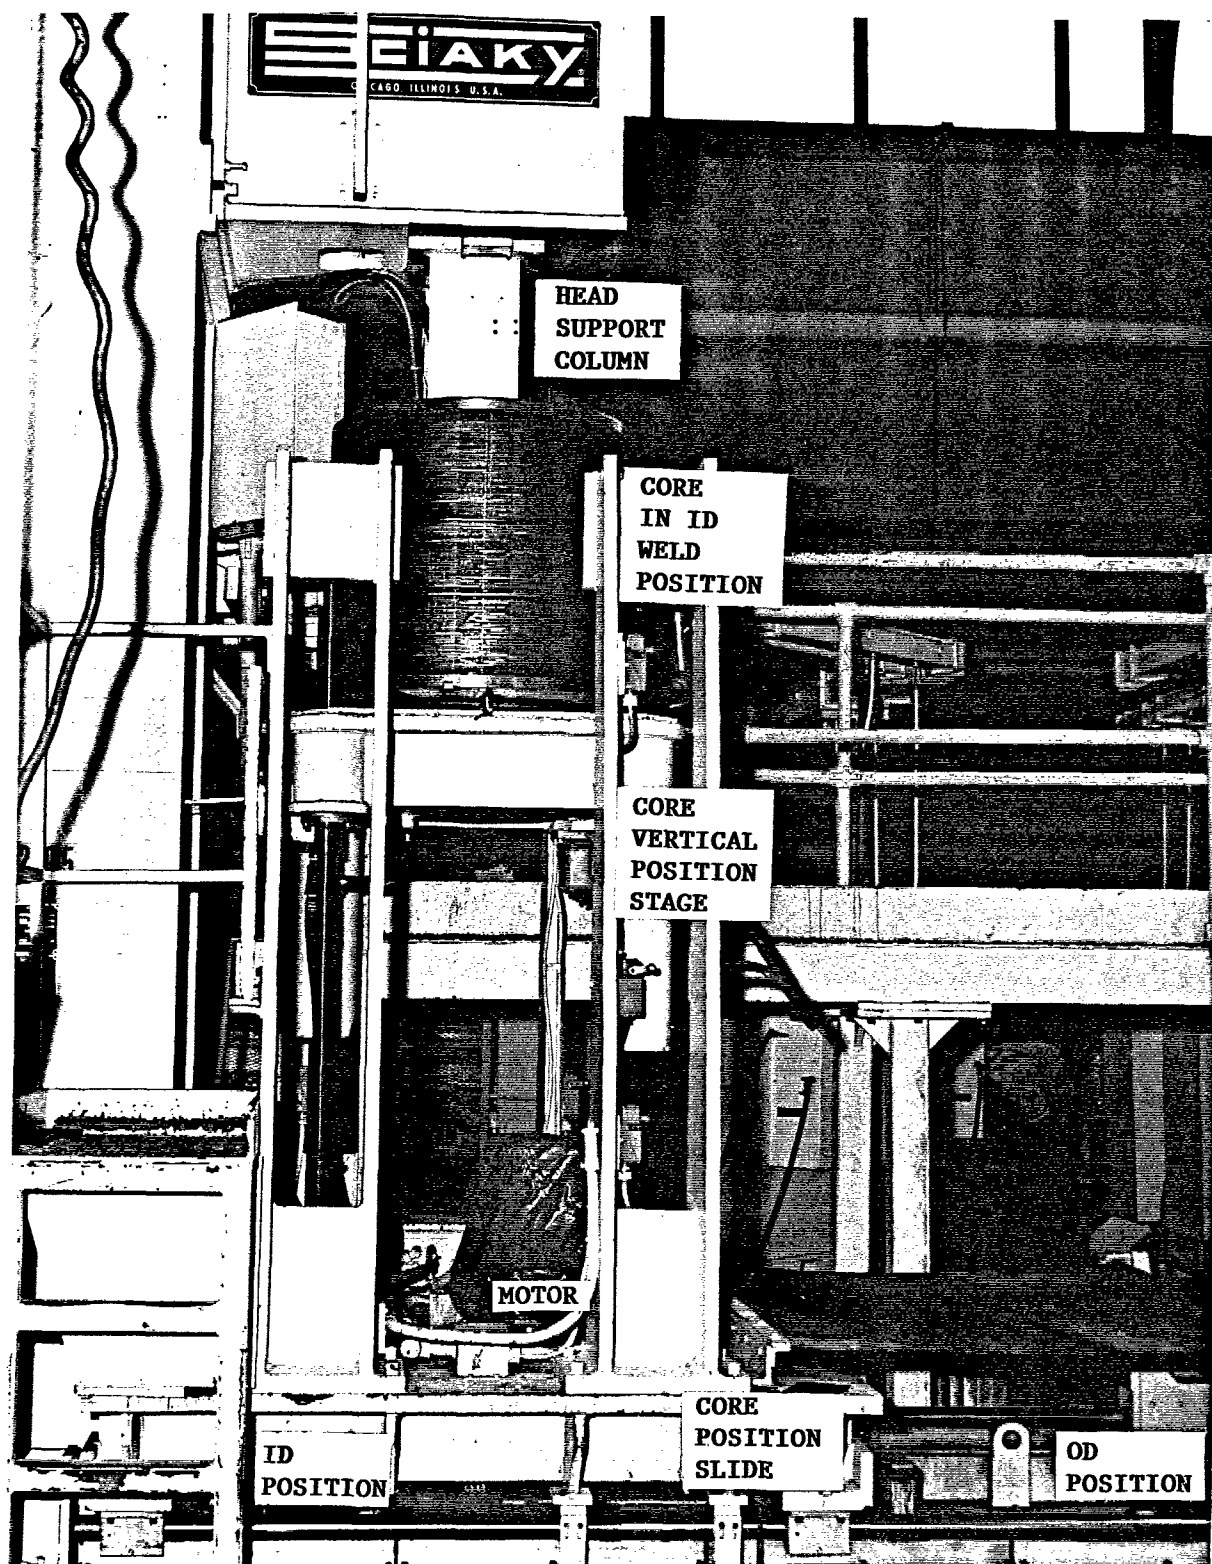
I.D./O.D. Resistance Welding Machine
